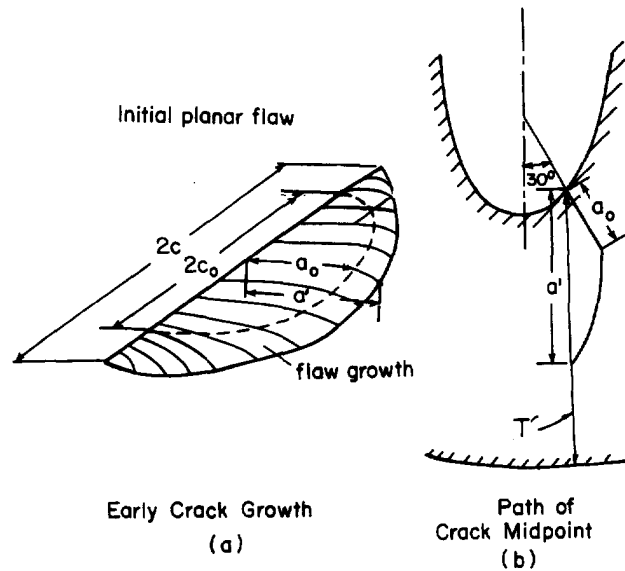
Off-axis crack shapes and definitions of geometric parameters ( $2c_0$ ,  $a_0$ —plane starter crack dimensions;  $a'$ —projected final crack depth).
